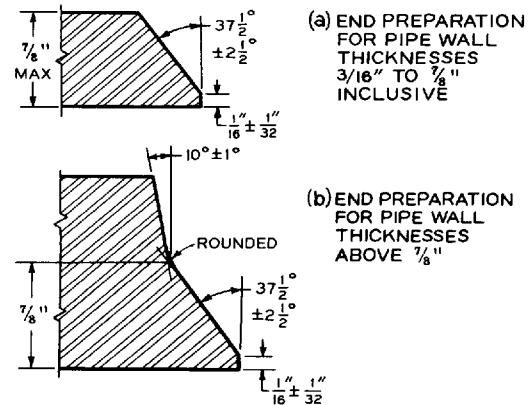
A BUTT-WELDING END PREPARATION
